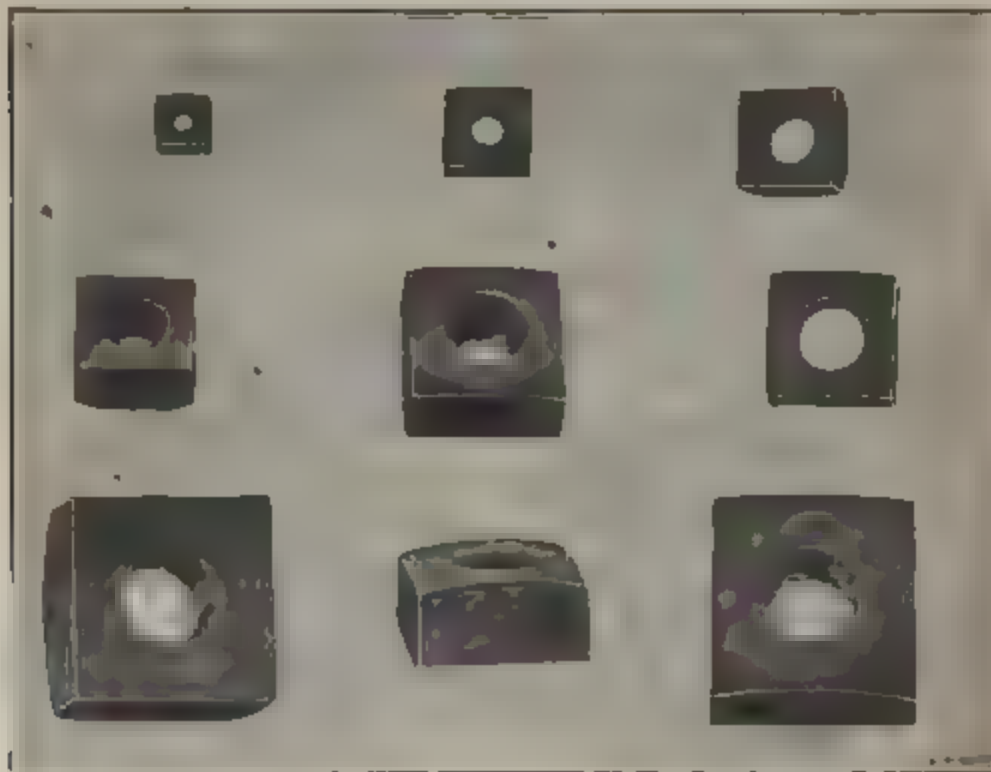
Samples of Square Nuts produced on Hot-forged Type of Nut Machine—Note Absence of Burrs or Fins
